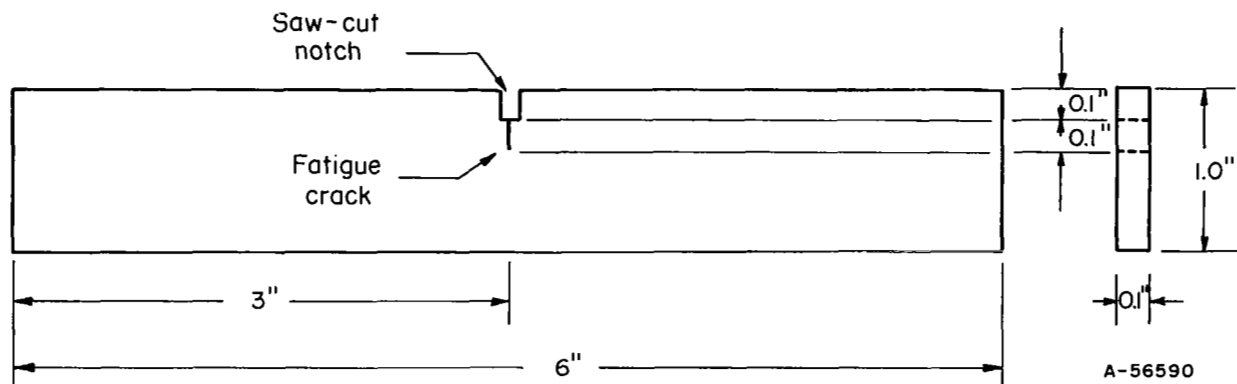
GEOMETRY OF PRECRACKED CANTILEVER TEST SPECIMEN
